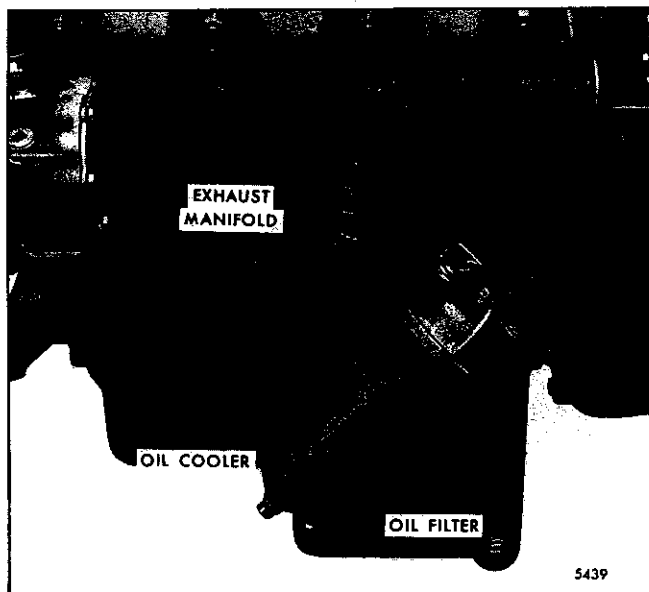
Typical Full-Flow Oil Filter Mounting (6V Engine Shown)
